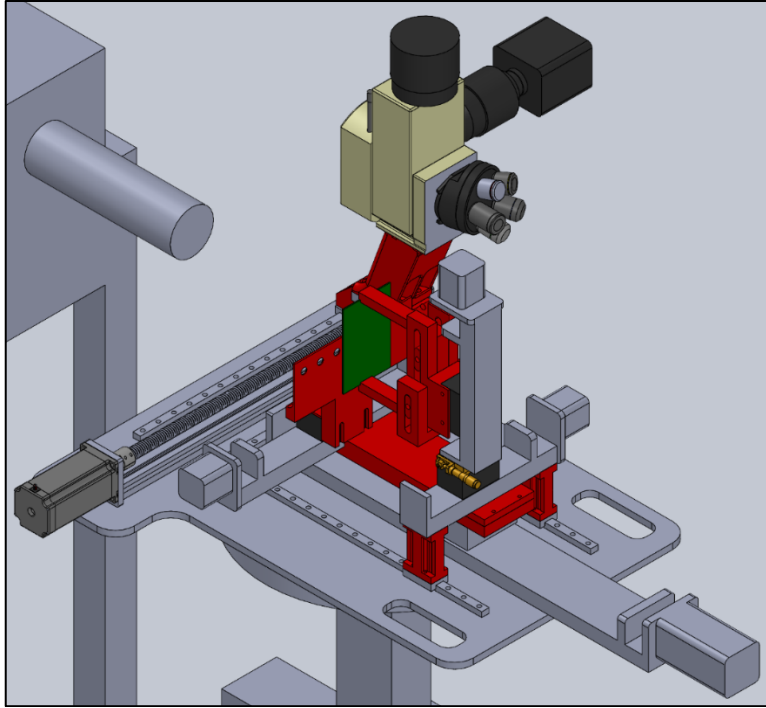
Vertical PCB Linear Motion Rail, PCB Mount, and PCB.
